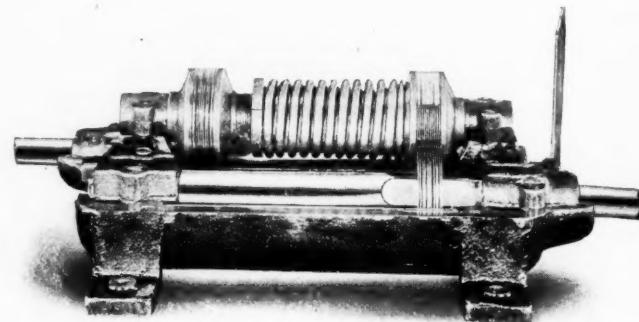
View of the Dill Drive with Cover removed from Casing, showing the Alternate Sets of Flat and Taper Disks which Transmit the Power.
